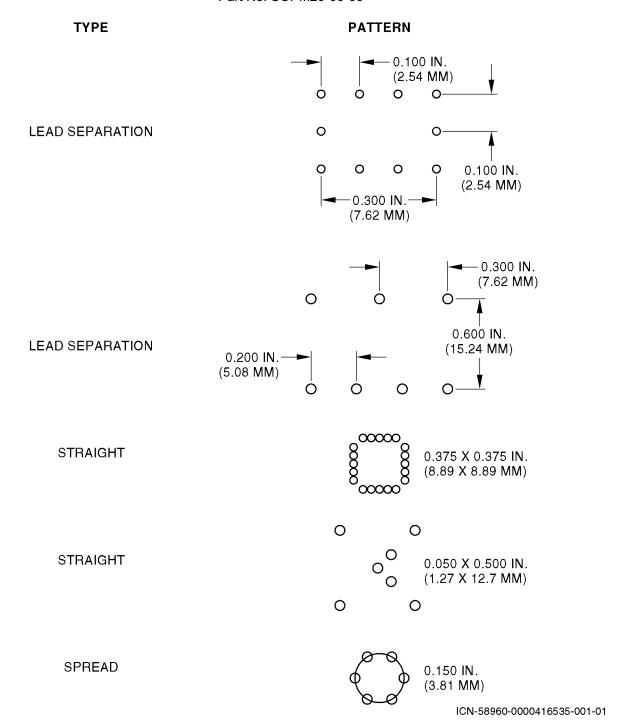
(Sheet 3 of 8) Lead Patterns and Dimensions
